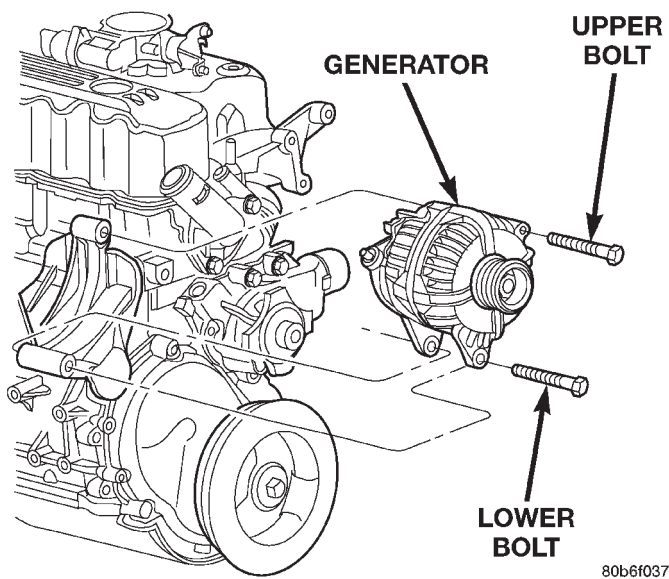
Remove/Install Generator—4.0L 6-Cylinder Engine
